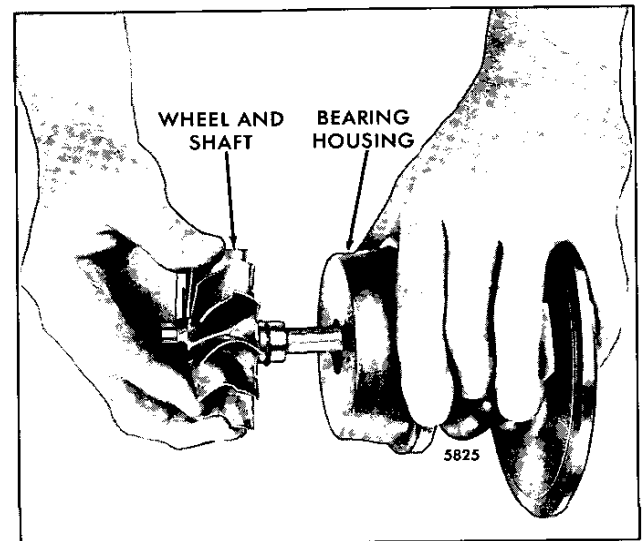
Installing Shaft and Wheel Assembly through Back Plate into Bearing Housing
